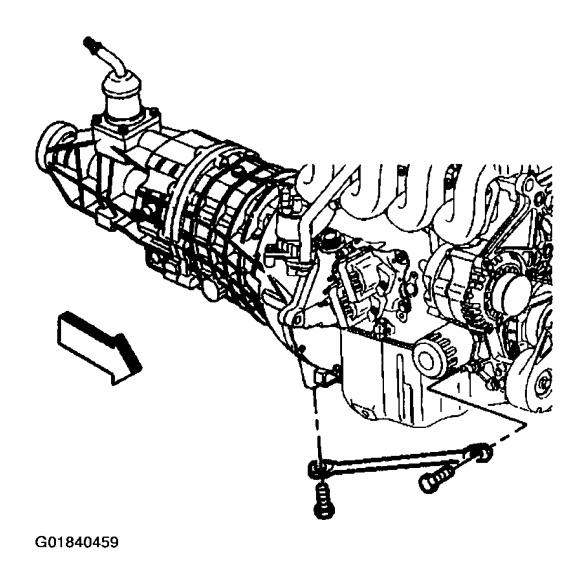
Installing Right Side Transmission-To-Engine Brace Bolts
